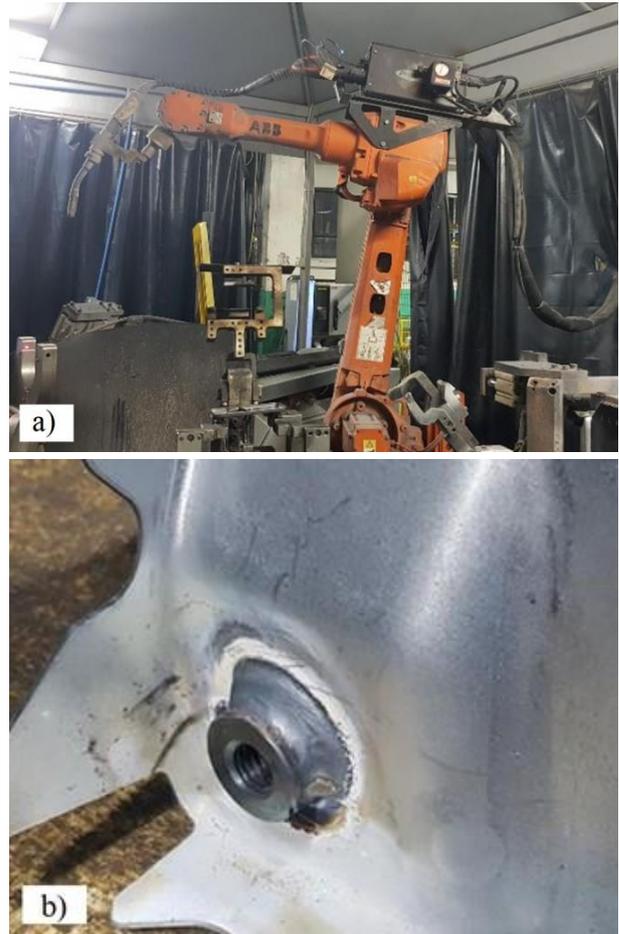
a) Robot arm used for the study and b) automotive part welded using coated contact tips
